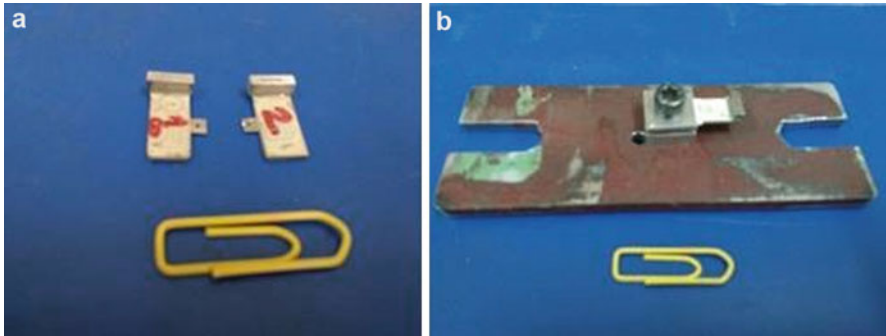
(a) Bimorph module. (b) Harvester assembly
